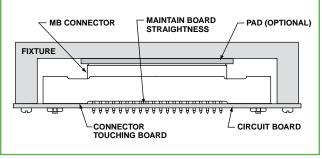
TYPICAL FIXTURE FOR SOLDERING MB CONNECTORS
